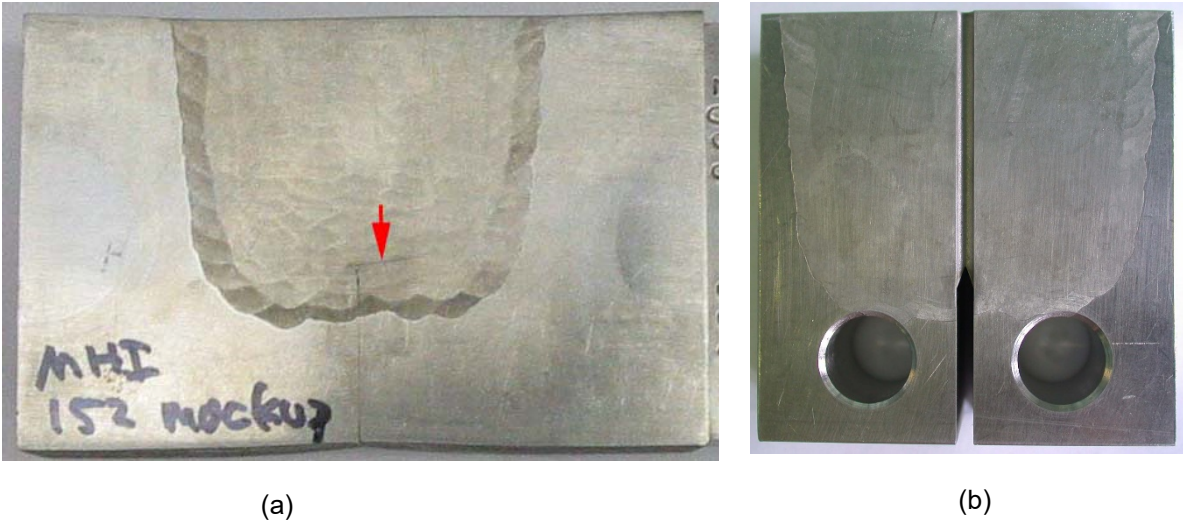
Alloy 152 “Kewaunee” mock-up weld produced by Mitsubishi Heavy Industries, Japan (a) and (b) resulting 1T CT specimen. The red arrow indicates a solidification crack.
